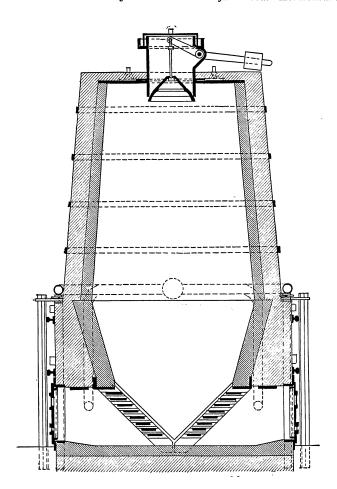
Gos Producer for Wood.—Section A D, Fig. 2.—Scale, 1:60.
